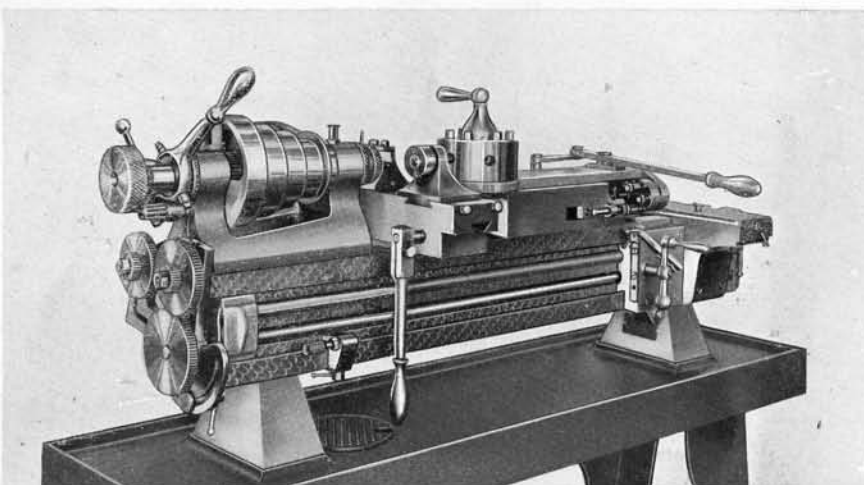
Rivett 608 (4 N.S.) lathe on oil pan and floor legs with Lever Chuck Closer, Automatic Indexing Turret Attachment and Cutting-Off and Forming Slide
